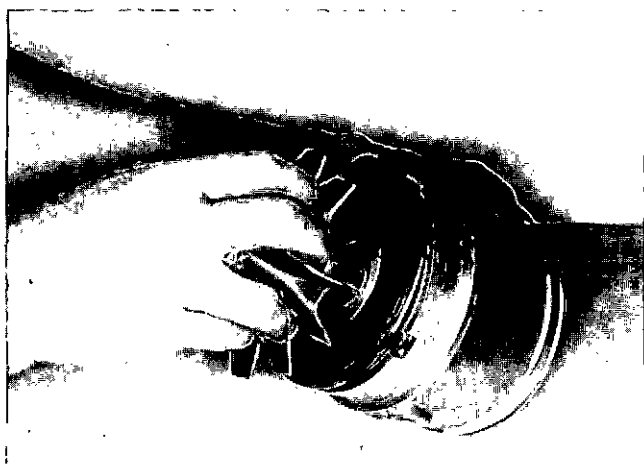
, (VTST37). Installing the turbine wheel and shaft into the bearing housing
